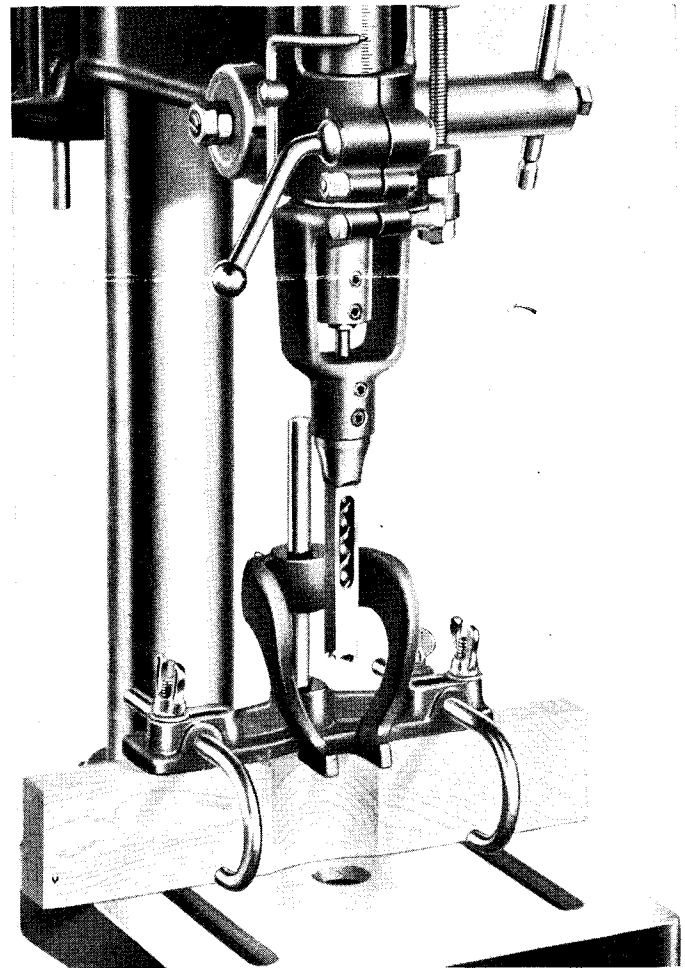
Mortising Attachment No. 976 Mounted on Drill Press.
